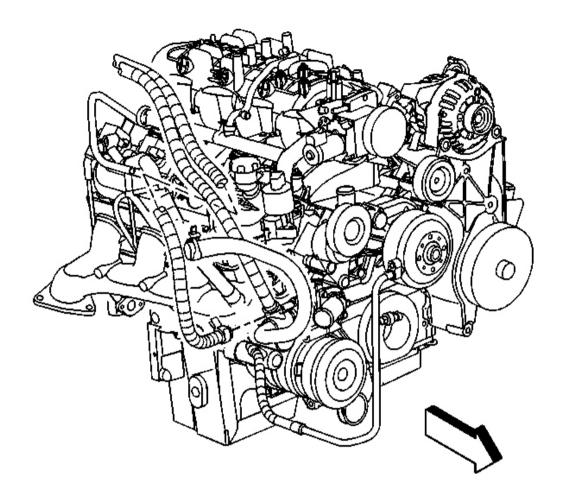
Heater Inlet Hose Courtesy of GENERAL MOTORS CORP.
